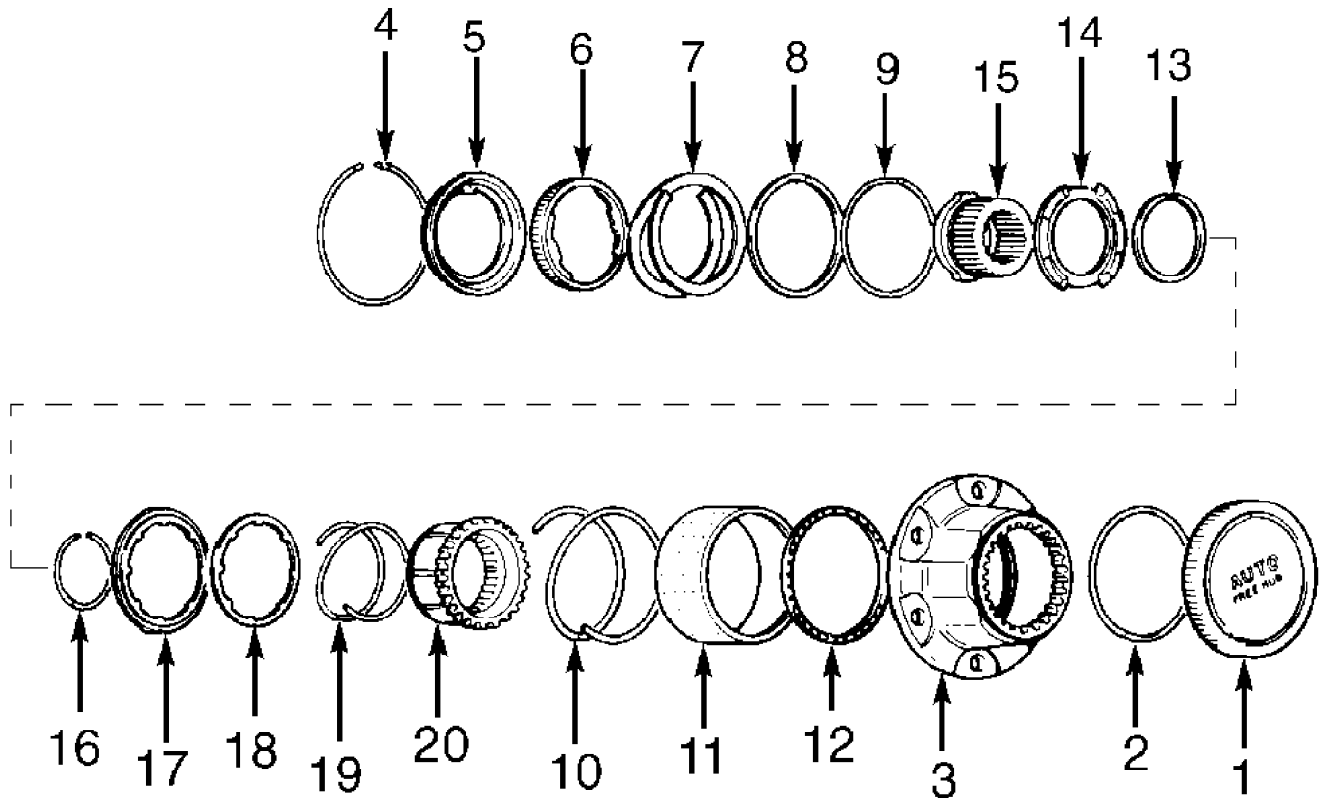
Exploded View Of Locking Clutch (Montero)
